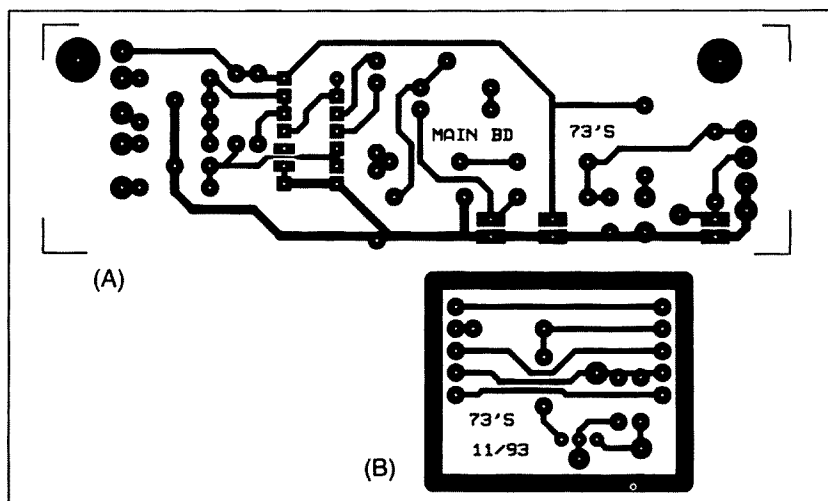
a) Main unit PC board pattern; b) Audio unit PC board pattern.
